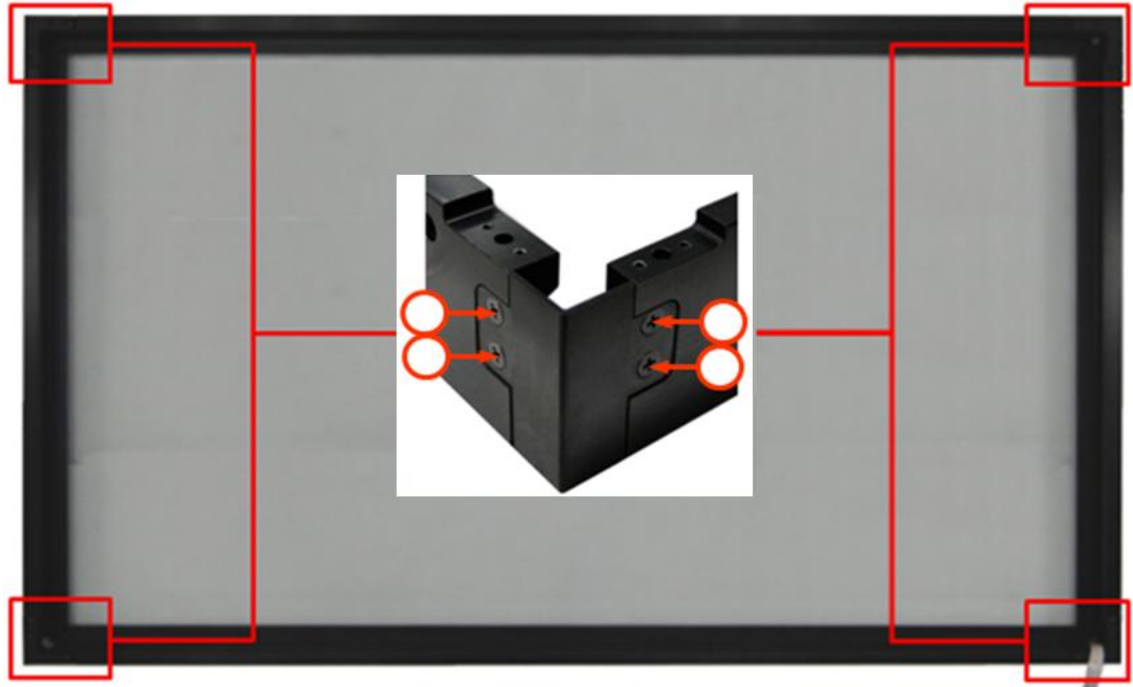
Remove screw 16EA & Disassemble corner mold bracket 4EA
